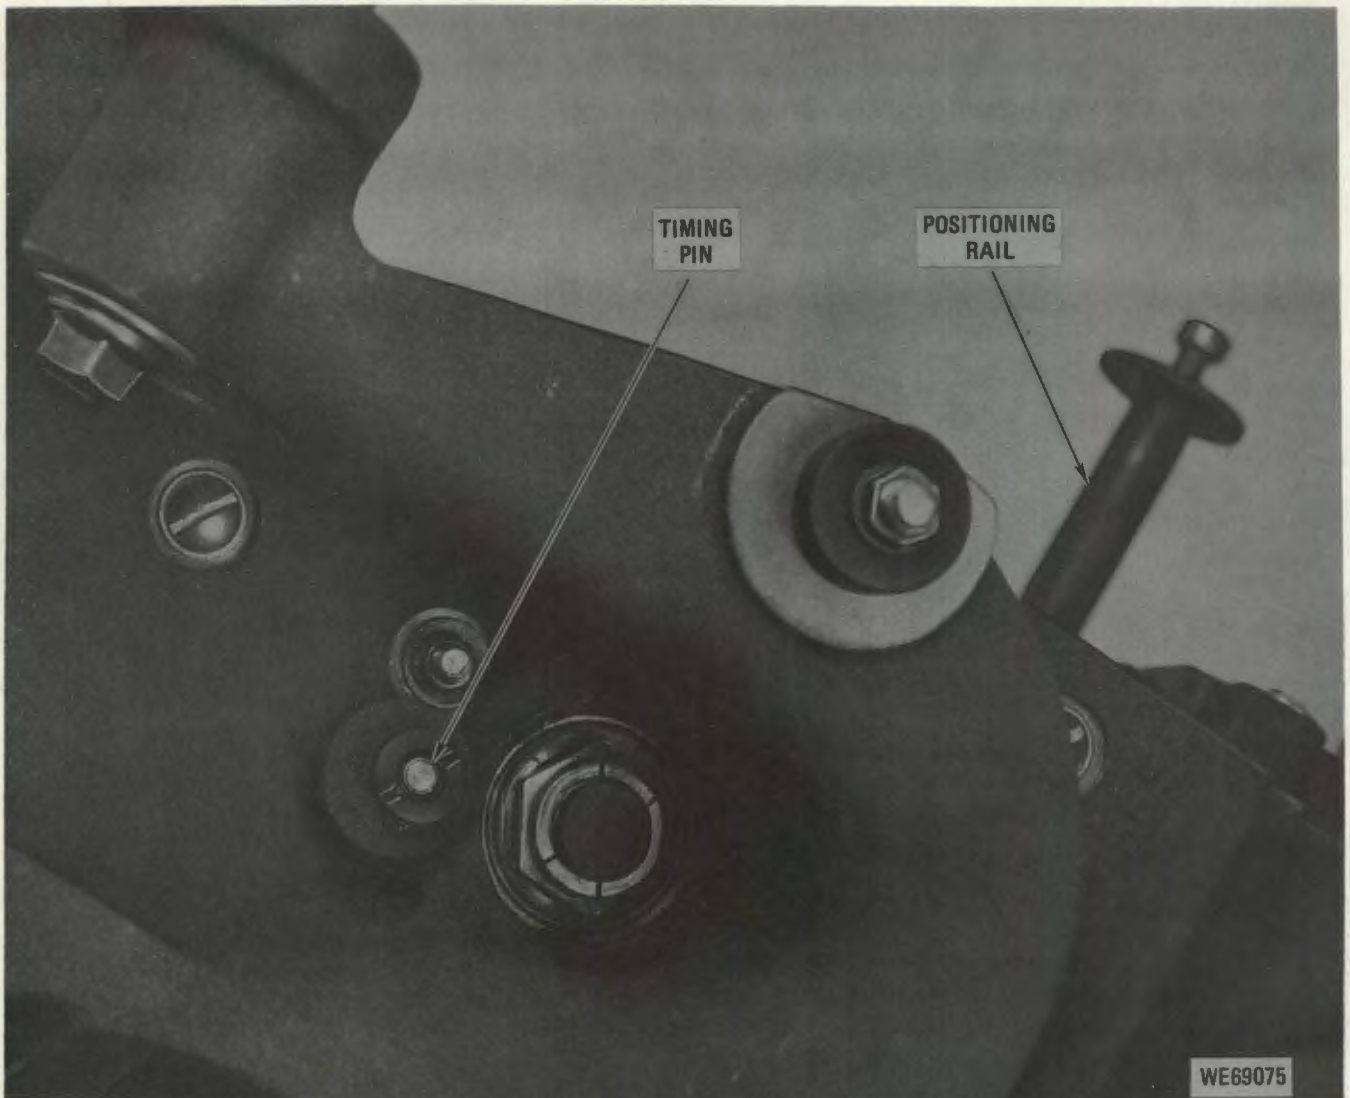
Exit unit assembly and drum drive motor, parts location.
